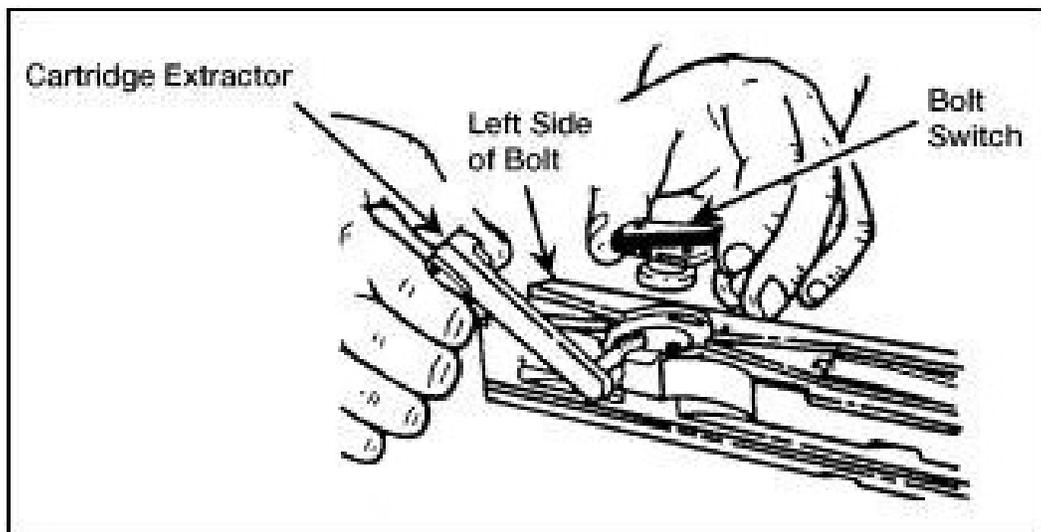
ST-1025_09 (Removal of the cartridge extractor and bolt)
